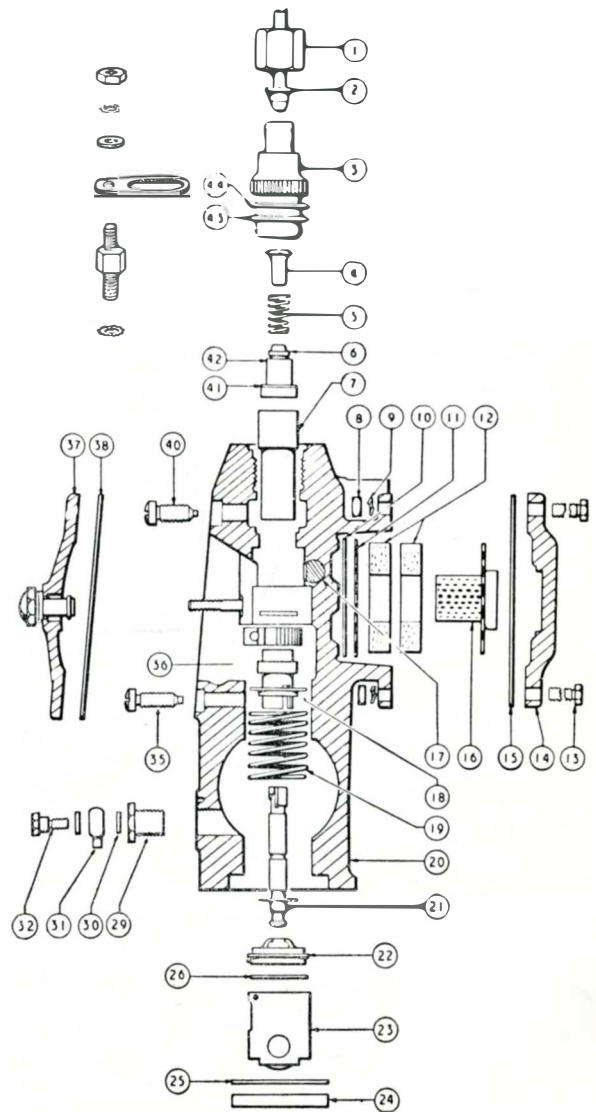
EXPLODED VIEW OF THE PUMP UNIT
